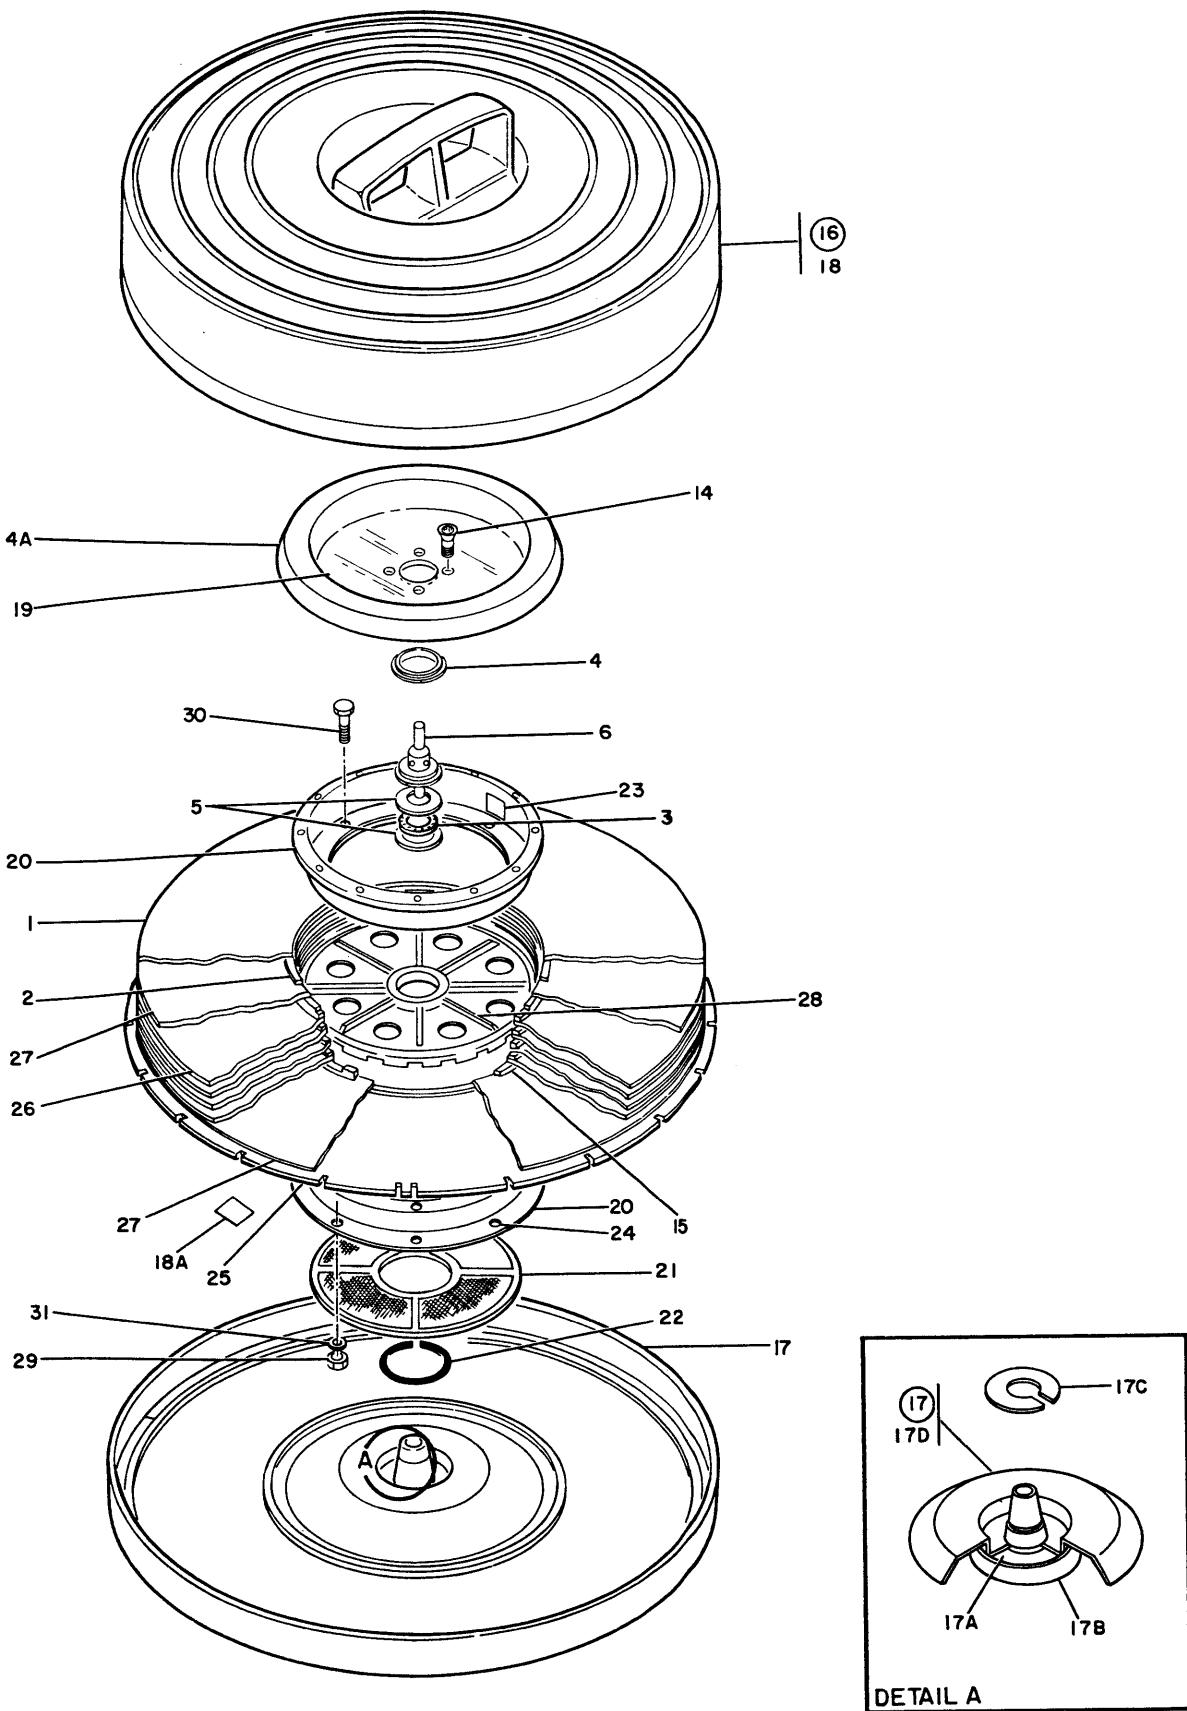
DISK PACK ASSEMBLY. SEE LIST 18.
